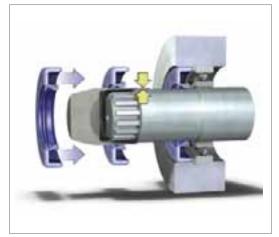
Fitting over a shaft with a tongue and groove joint (also for a sharp-edged shoulder on shaft)
